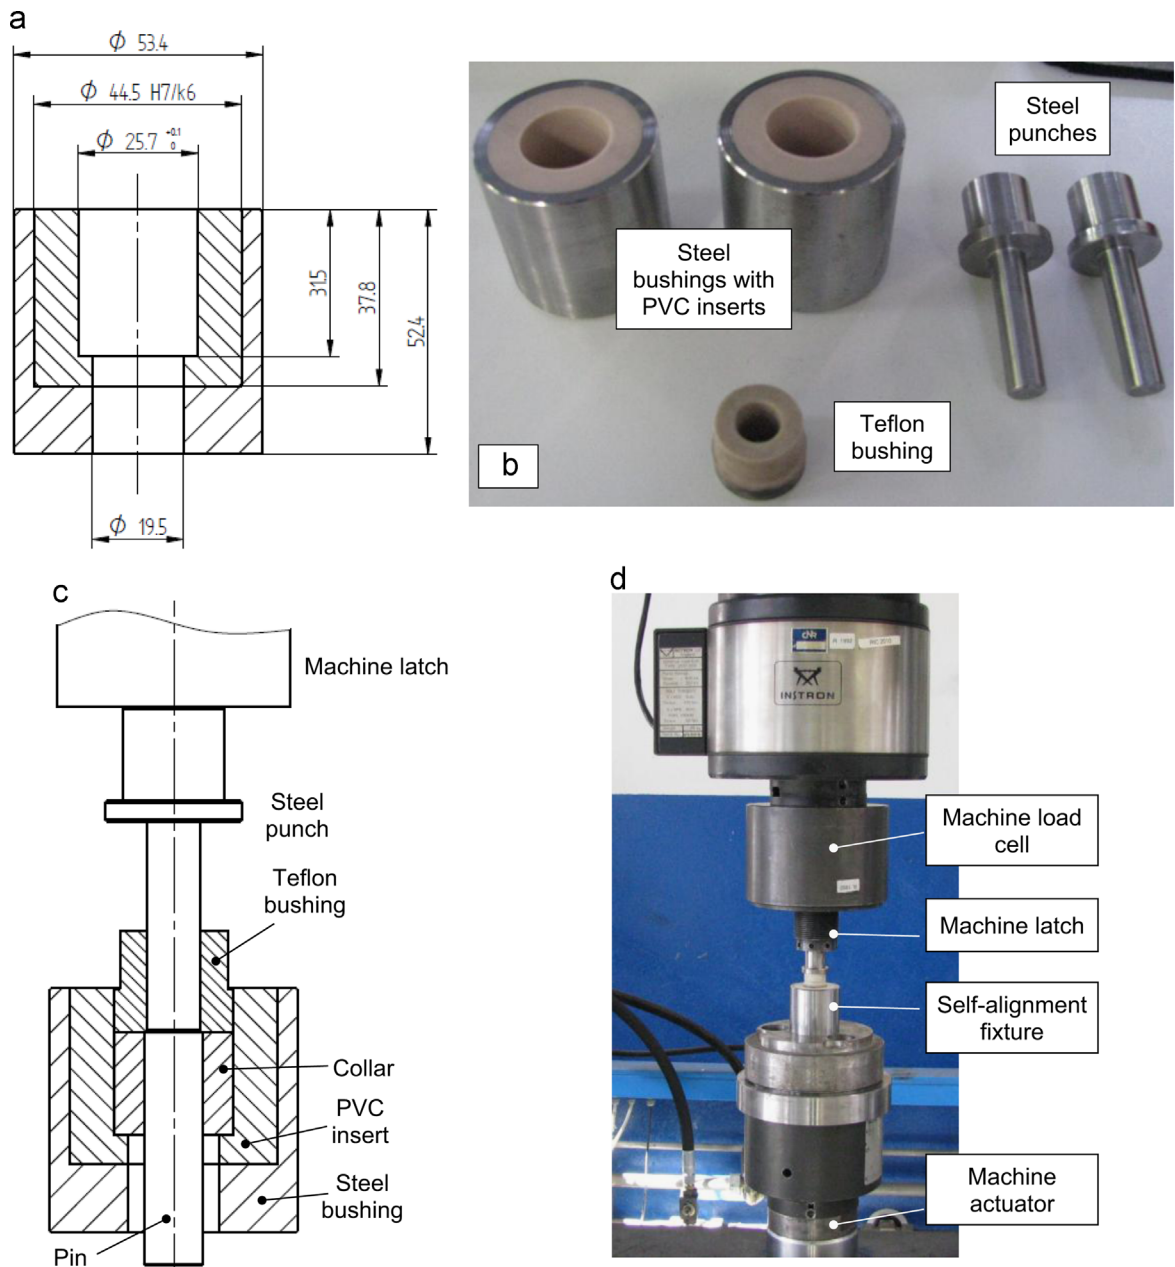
(a) Drawing of the bushing with inner PVC insert (all dimensions in mm), (b) two sets of self-alignment device, experimental setting in trial conditions shown by a section view (c) and a picture taken just after decoupling (d).
